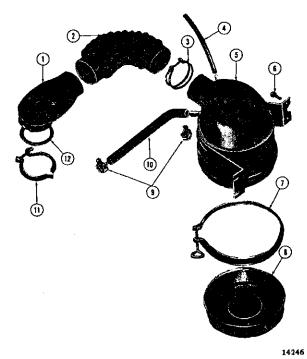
OIL BATH AIR CLEANER— HURRICANE F4 ENGINE
